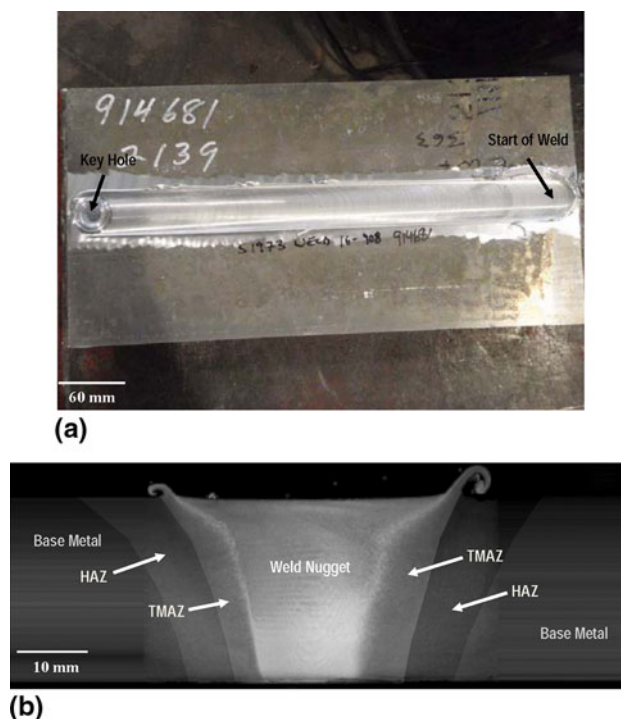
(a) Top view and (b) transverse section macrograph of a AA2139-T8 flat-butt joint
